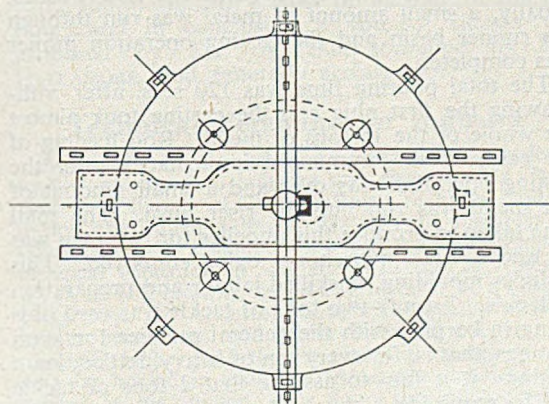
Plan View of the Runner-box Arrangement for the Impeller Casting.
